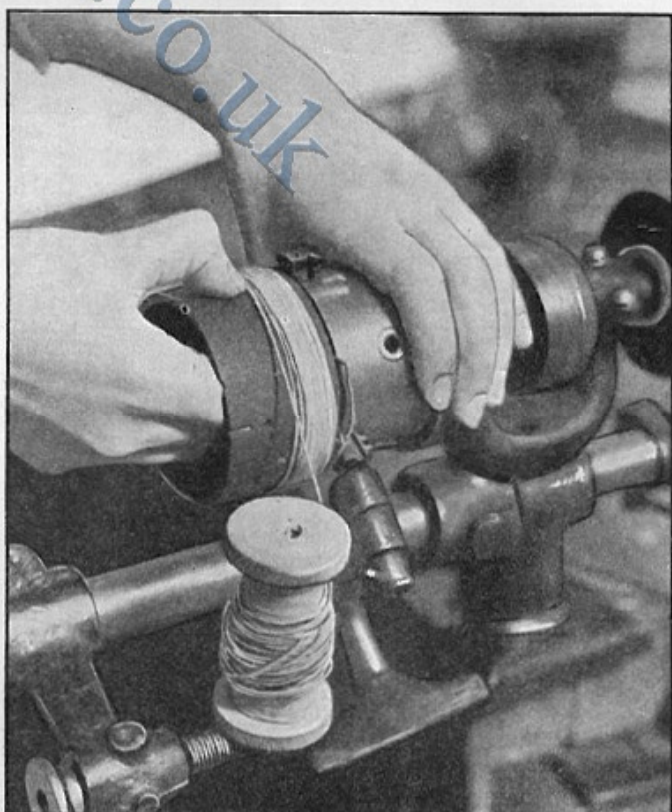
Method of winding a coil by hand when using a mandrel.
